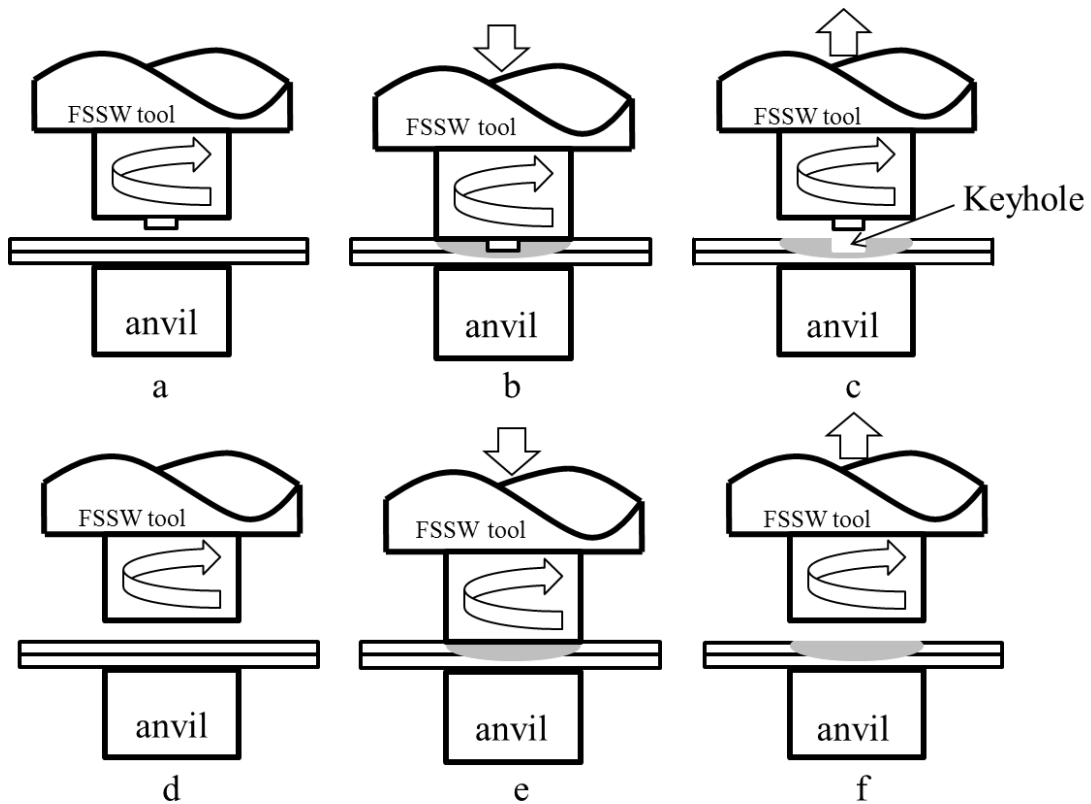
The Friction Stir Spot Welding Process. A-C: represents the traditional FSSW process using a tool with a pin. The resulting keyhole defect is illustrated. D-F: represents the FSSW process using a pinless tool. The lack of the keyhole defect is illustrated.
